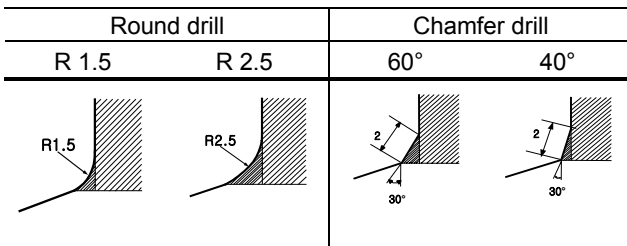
Schematic illustration of drilling process when drill exits with chamfer drill and round drill
